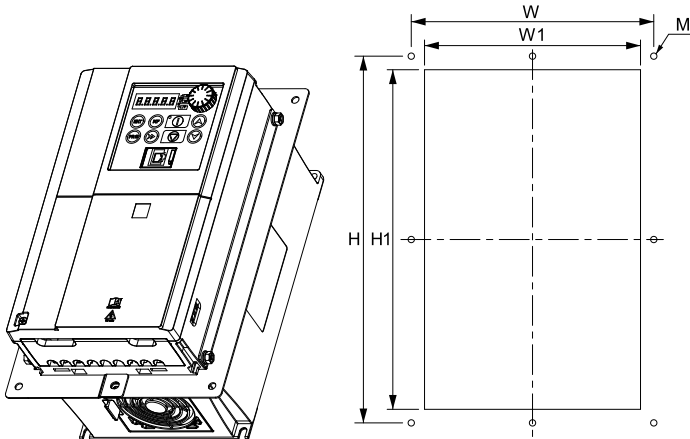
Frame A/B/C/D Middle Installation Dimension Drawing
